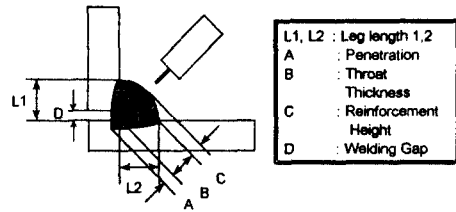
Profile of weld bead shape in Horizontal Fillet Welding
